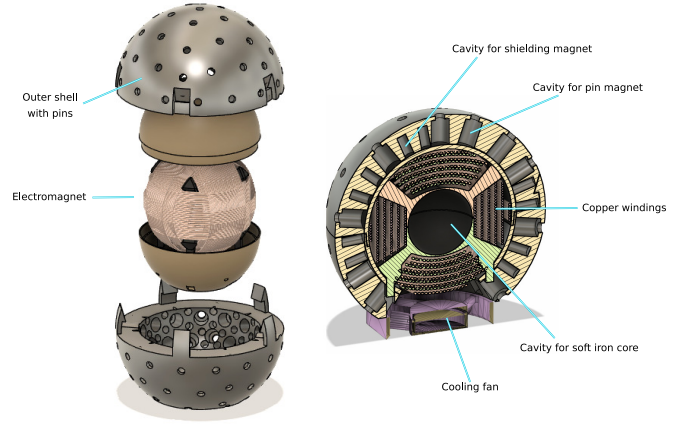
Exploded view and cross-section of the prototype design. Magnets are inserted from the inside and held in place with a thin hemispherical shell, which in turn encases the electromagnet. The inner shell has a diameter of 70mm. The cavities allow for 0.2mm of tolerance around the magnets.
